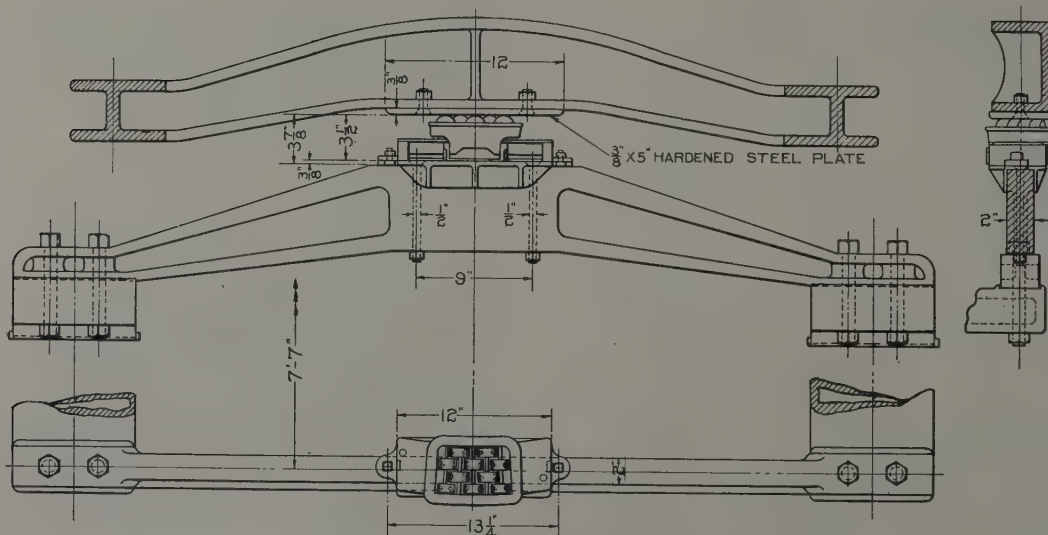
Creco Roller Side Bearing Applied to Bearing Bridge of Six-Wheel Truck.
